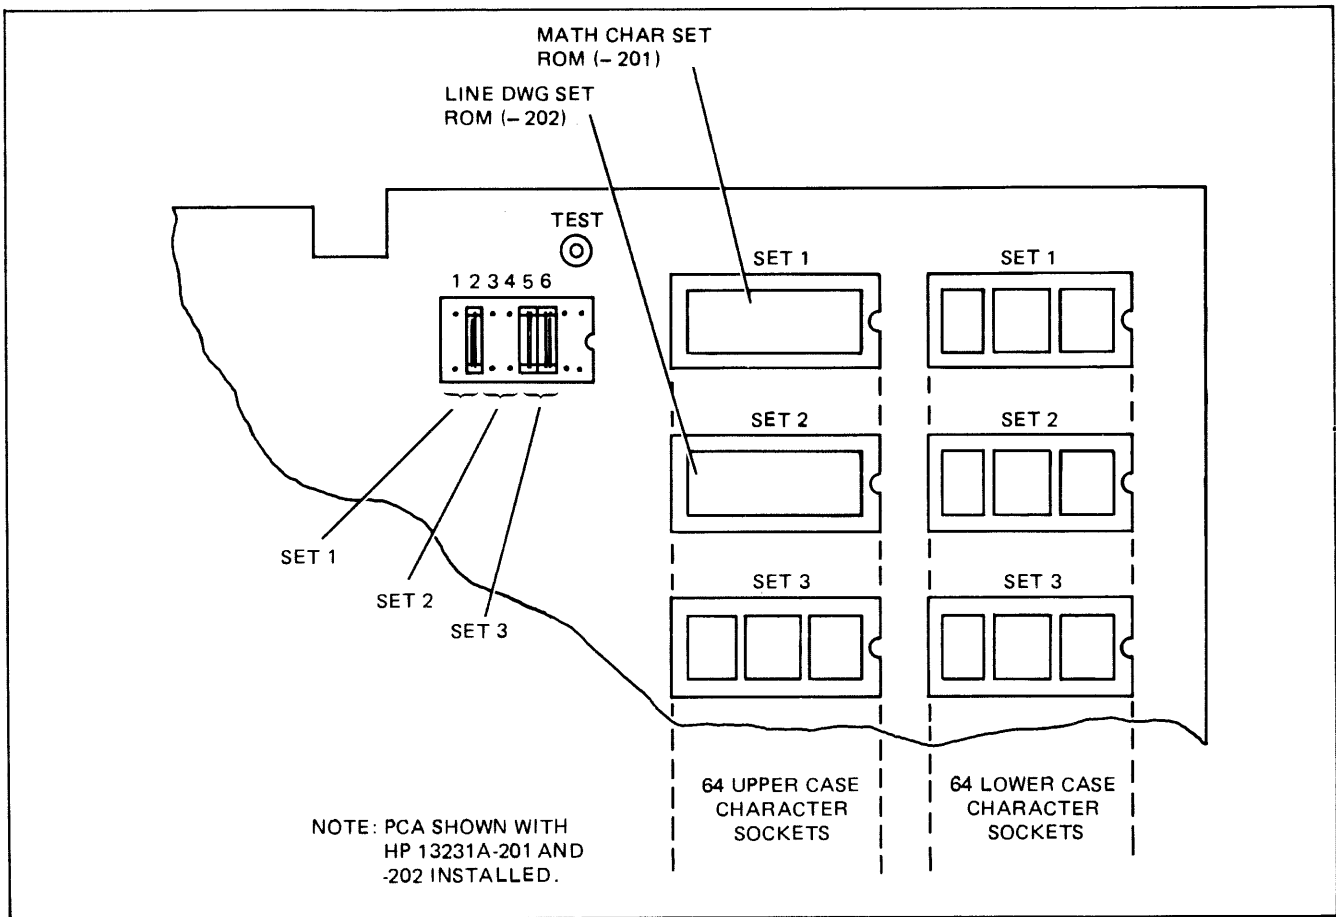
Display Expansion PCA Jumper and ROM Socket Locations
